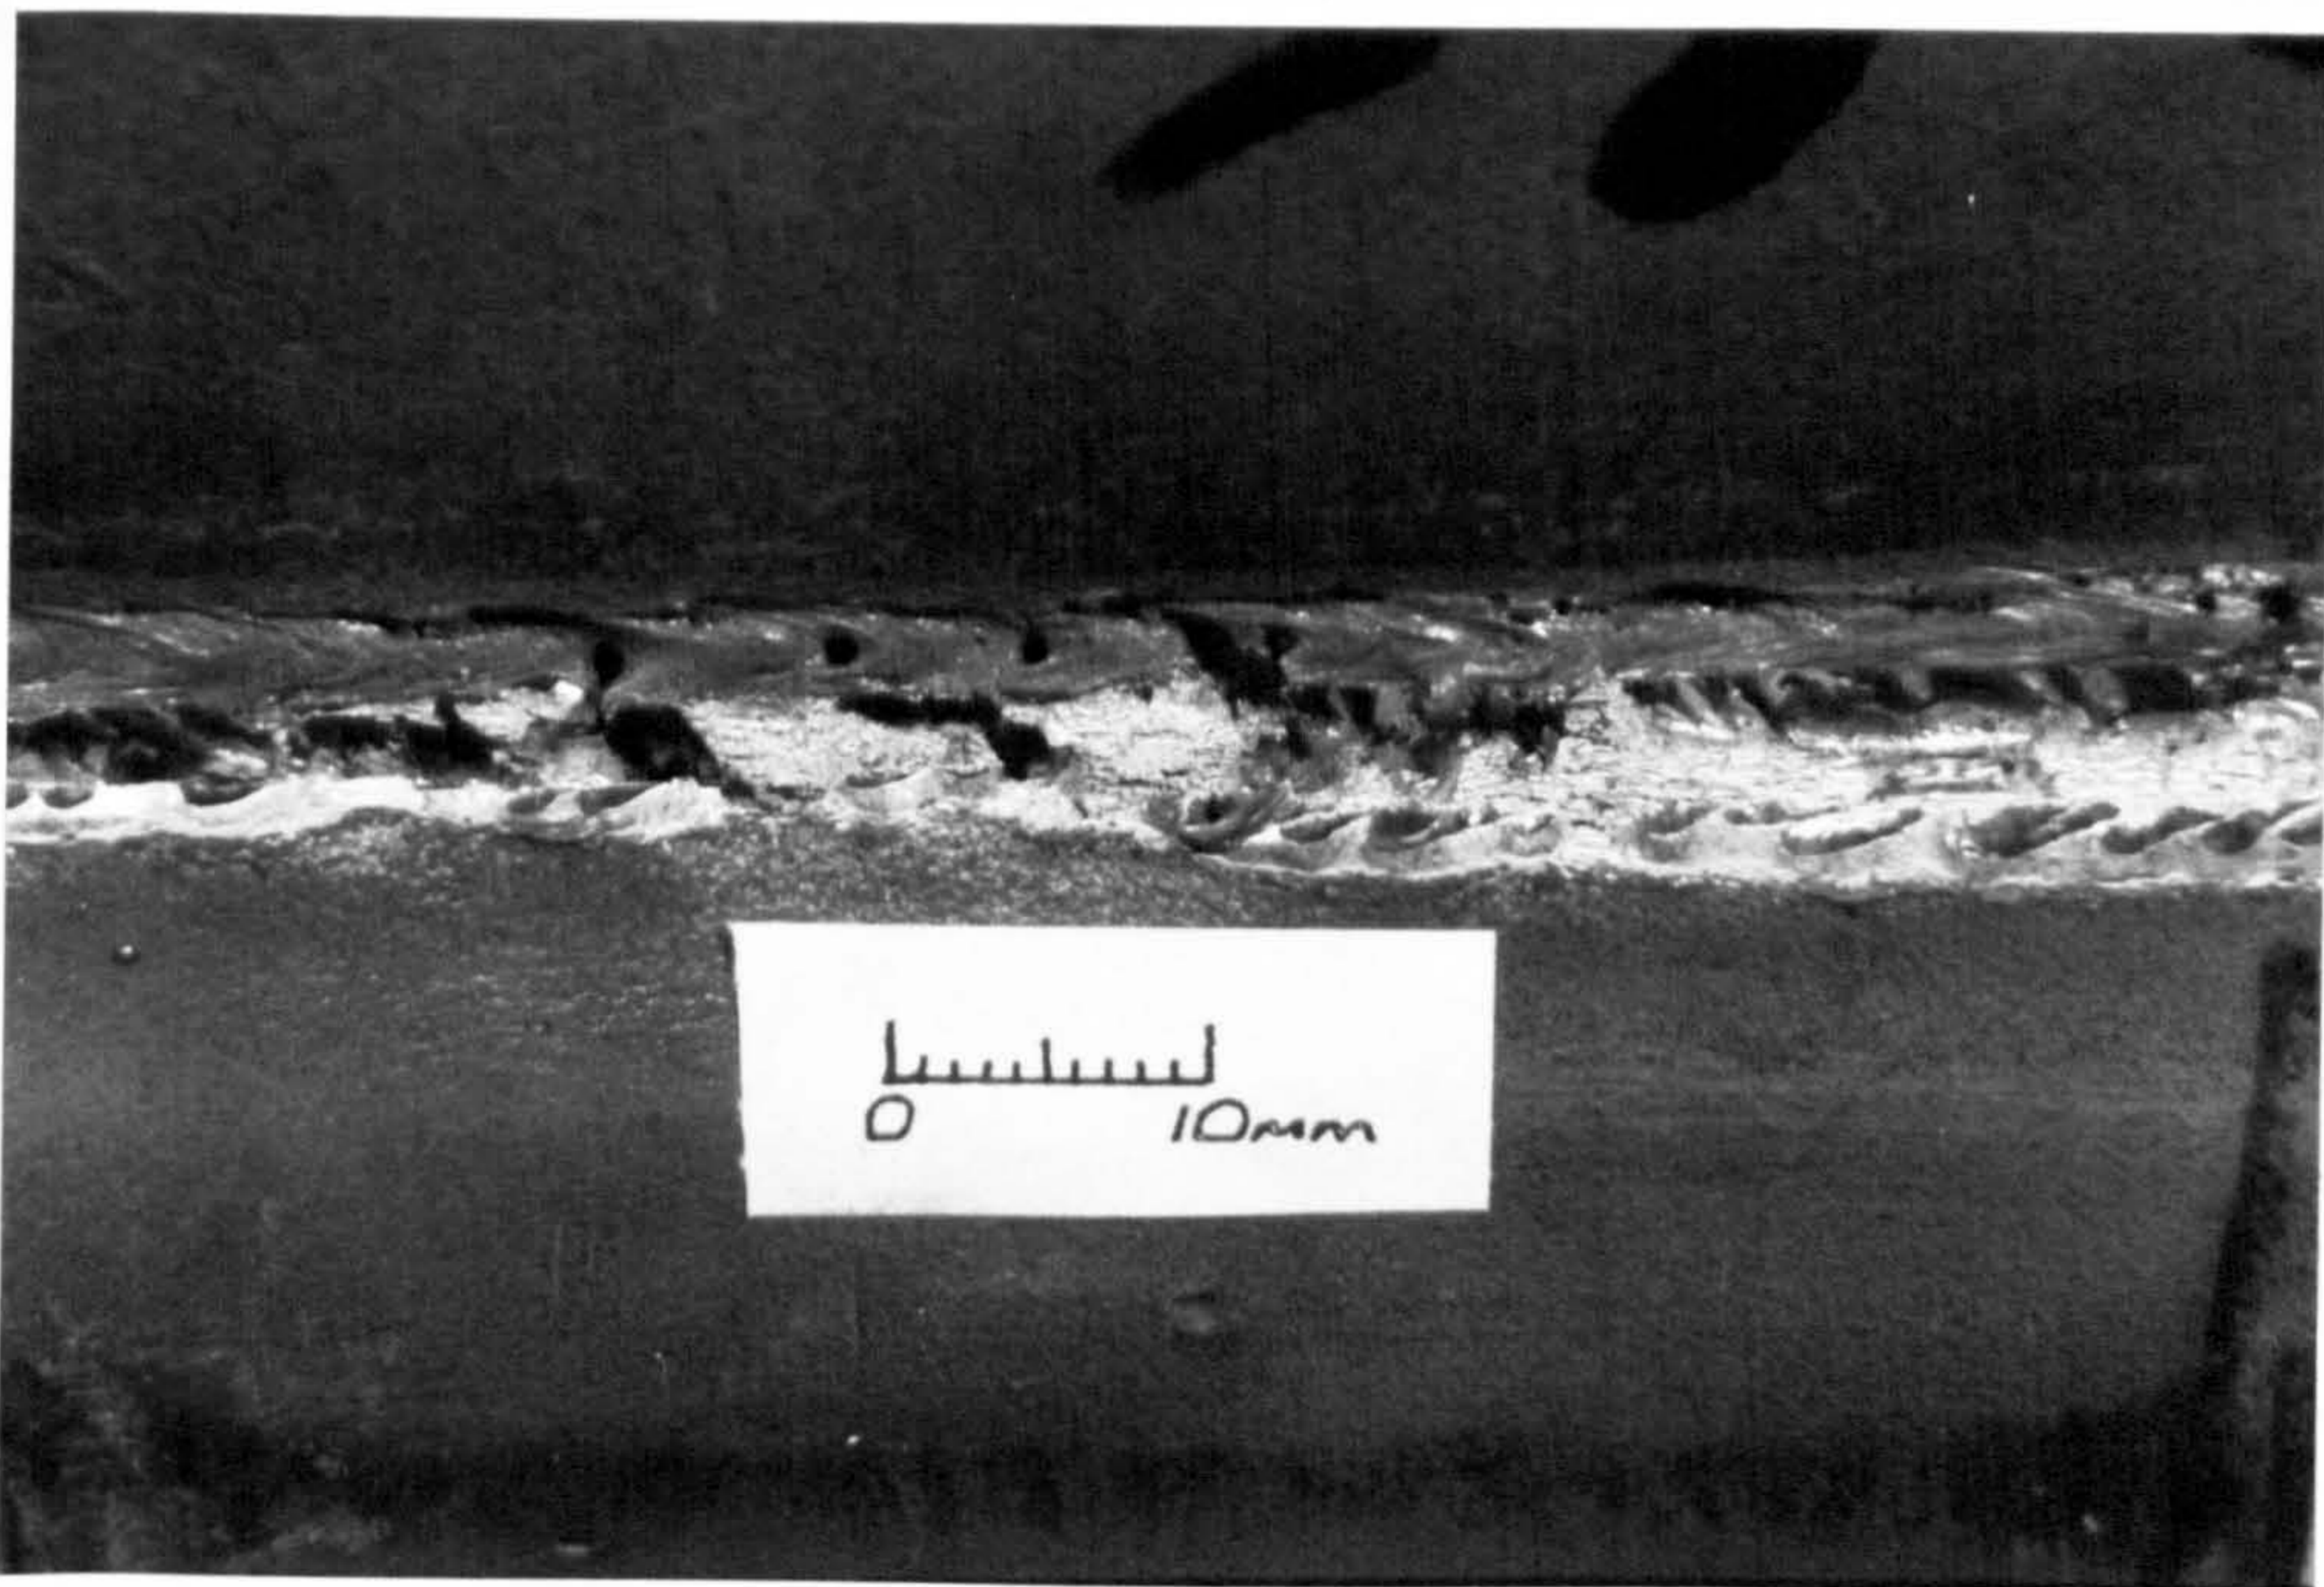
Initial failure during fillet fracture testing due to porosity
